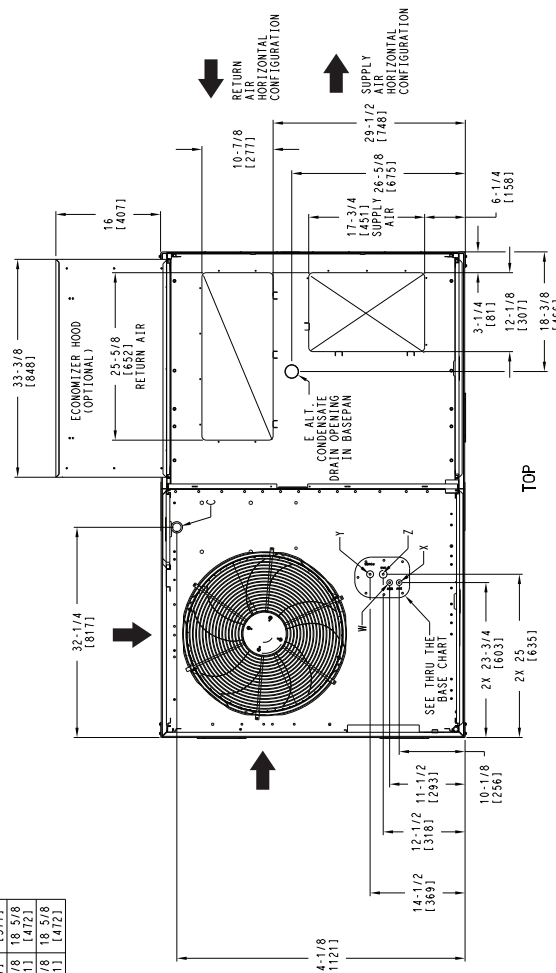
50FCQ*04-07 Dimensional Drawing
